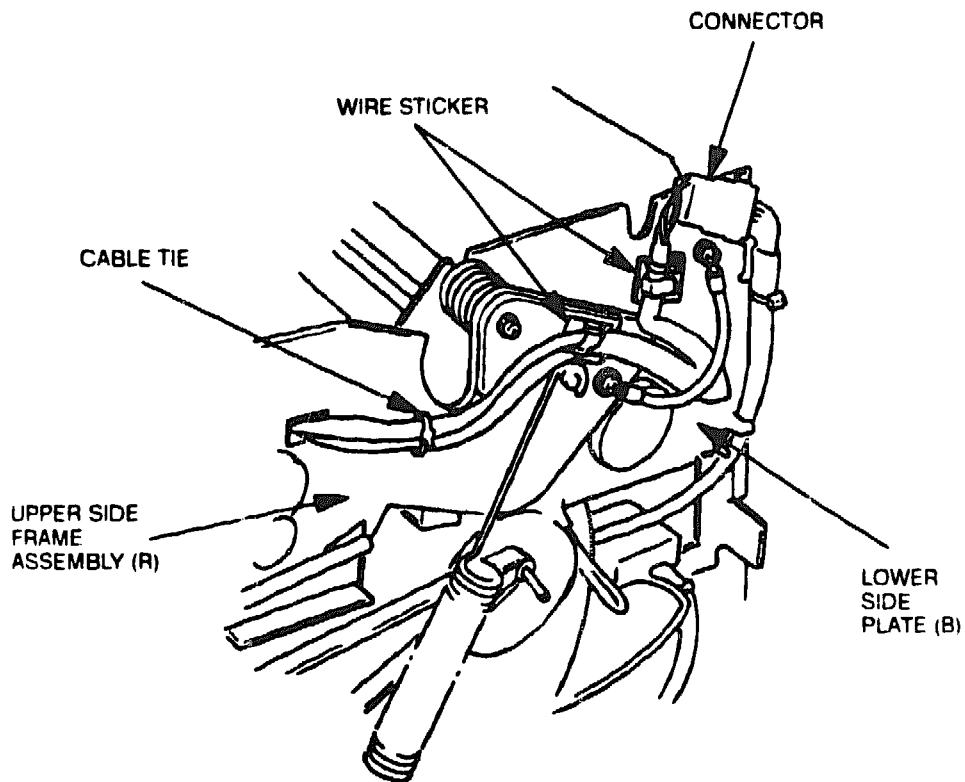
Paper Sensor Assembly Connector, Wire Stickers, and Cable Tie
